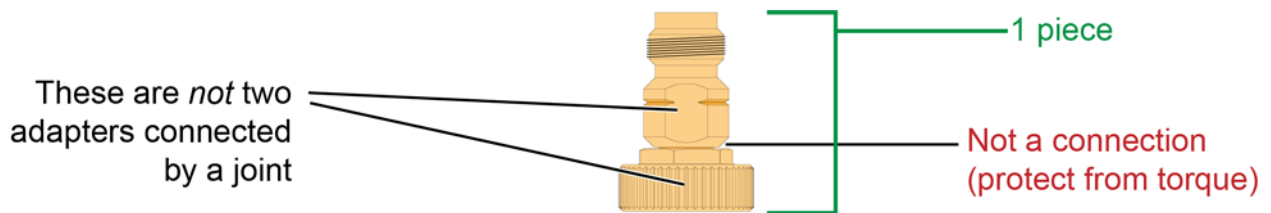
Torque Specification for Channel Input Threads (Y1901/3B adapters not shown)
